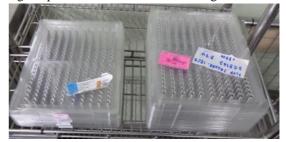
Container for spindle sleeve transferring with 200 pieces per tray.
